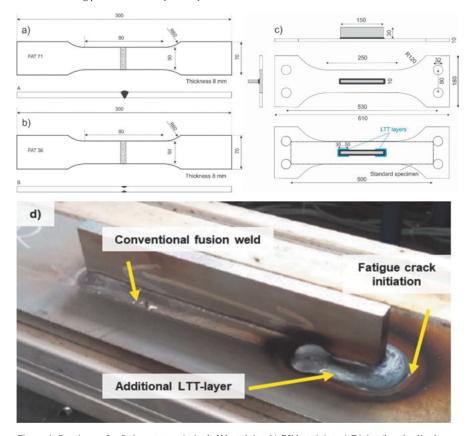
Specimens for fatigue tests: a) single-V butt joint, b) DY butt joint, c) T-joint (longitudinal stiffener), d) specimen overview, all dimensions in mm
